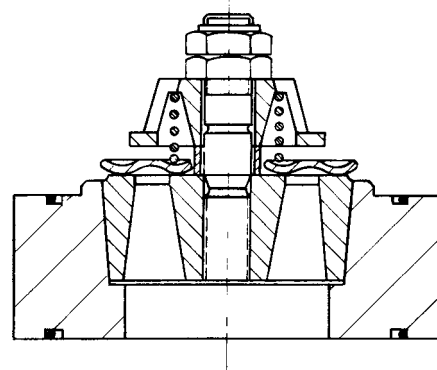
Reciprocating pump disk valve. (Durabla Manufacturing Company.)
